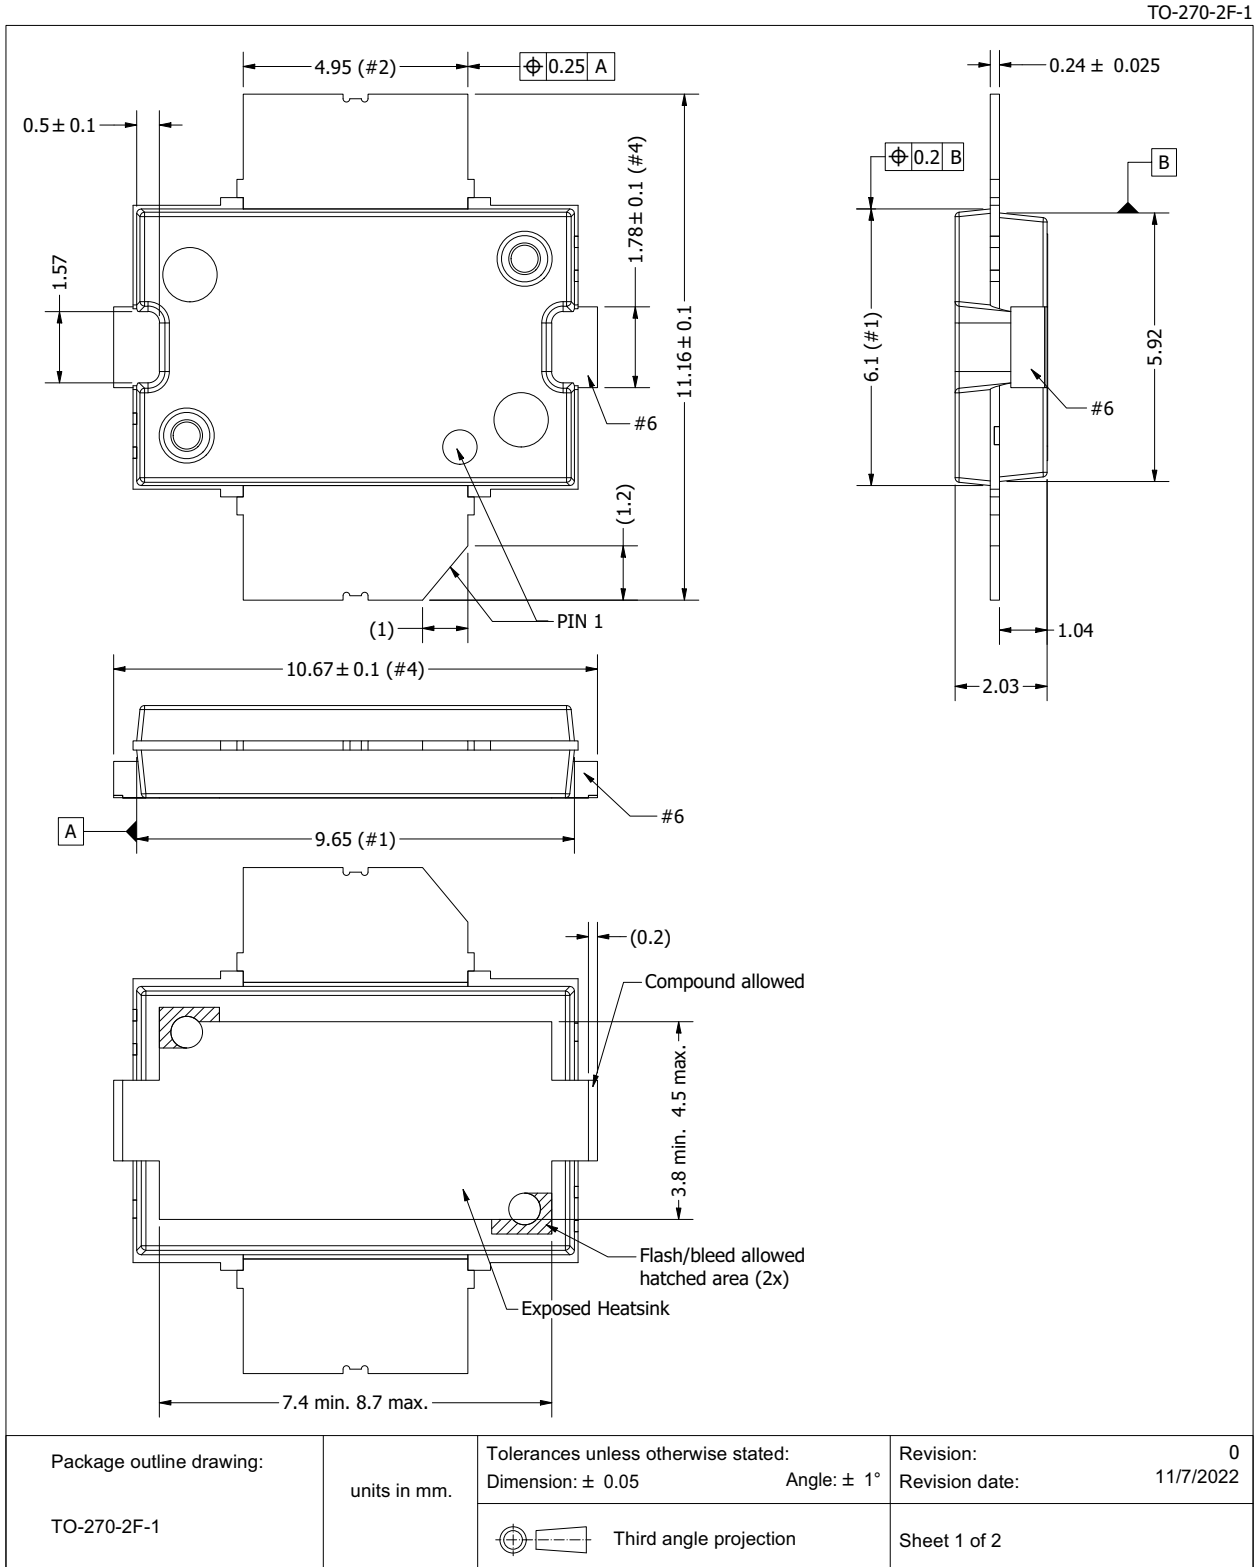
Package outline TO-270-2F-1 (sheet 1 of 2)
